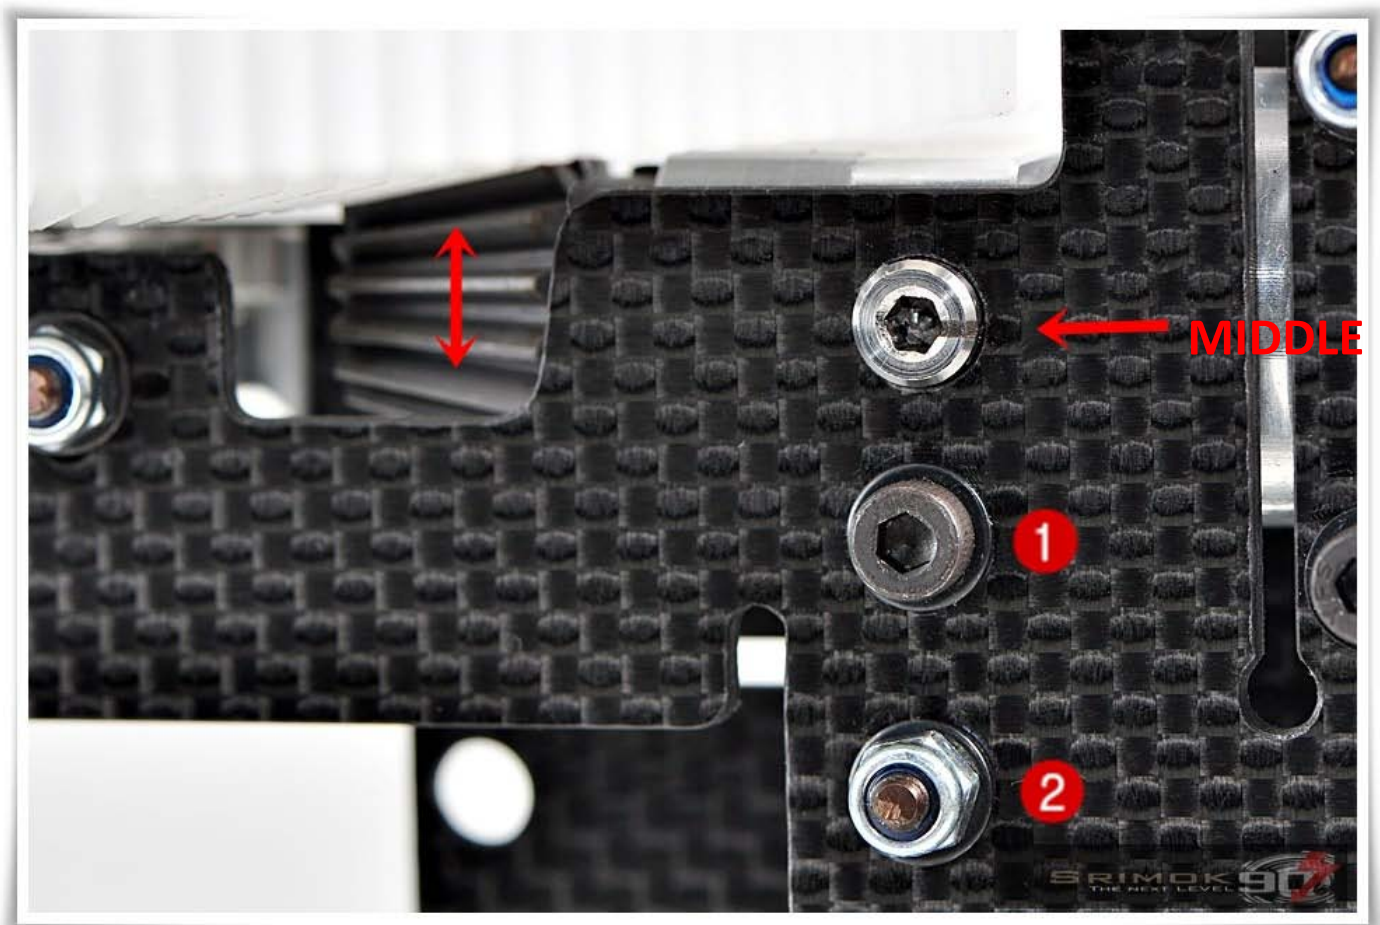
Picture E: Loosen Bevel Pinion Gear from Crown Gear by turn ABPG to LOWER
